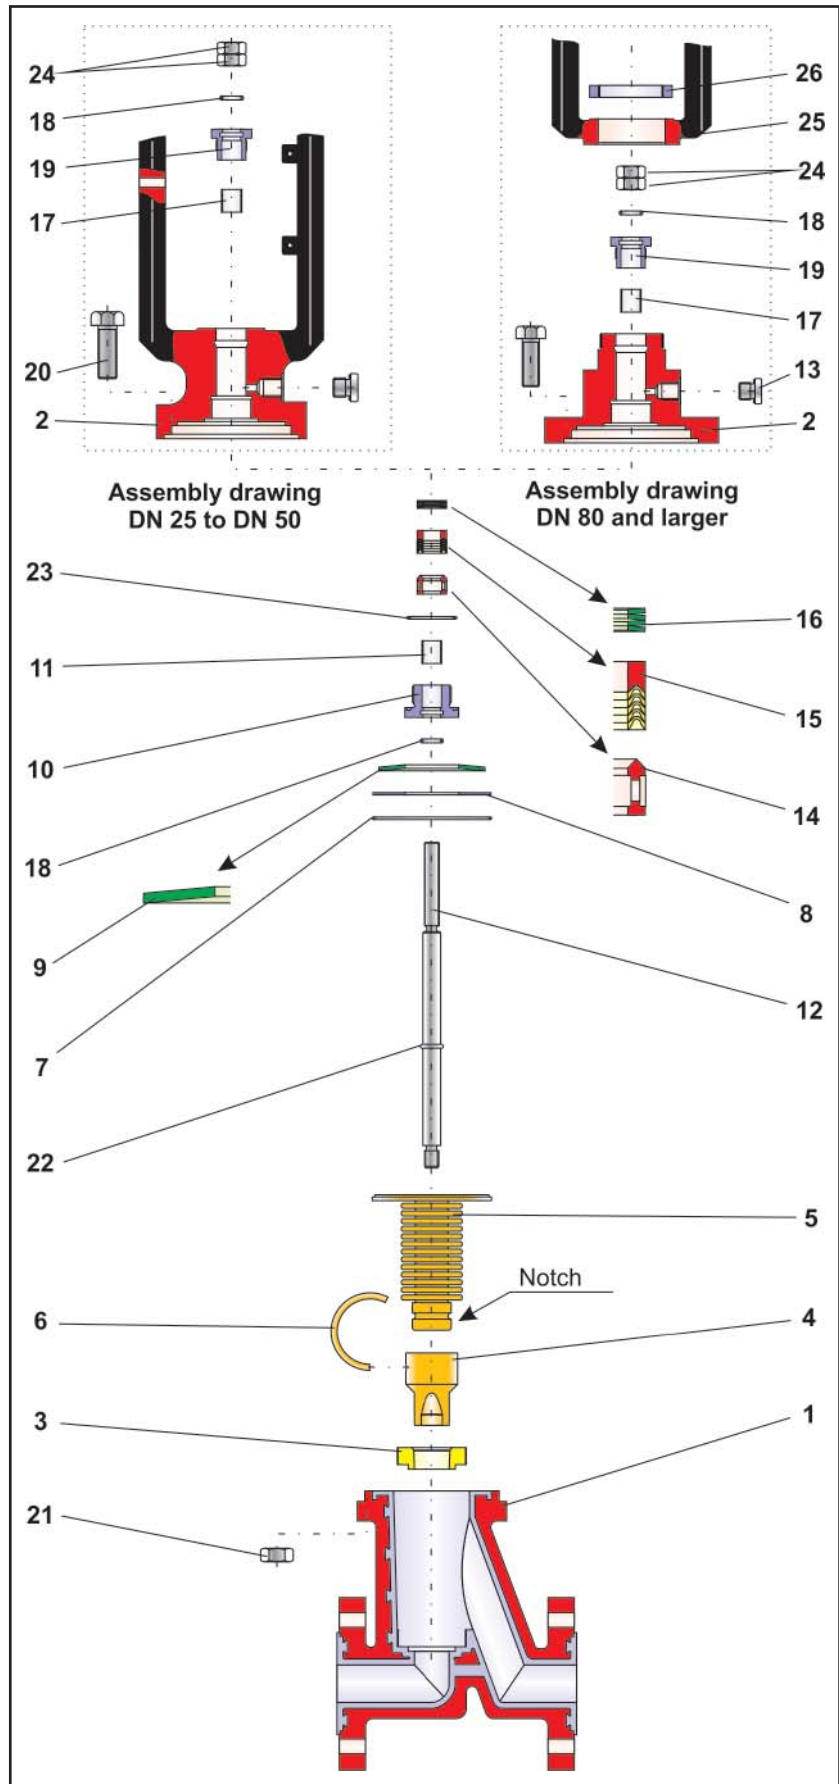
Explosion drawing of the Series 1b Valve manufactured from 2006
